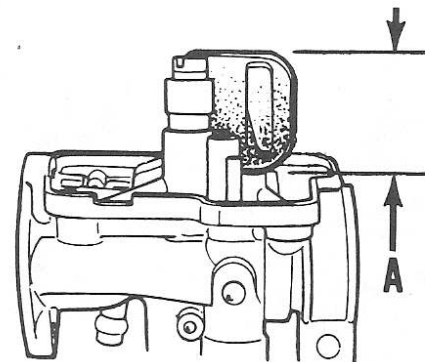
Float level (A) should be 24.5-25.0 mm (0.96-1.00 in.). Bend float arm tang to adjust.
